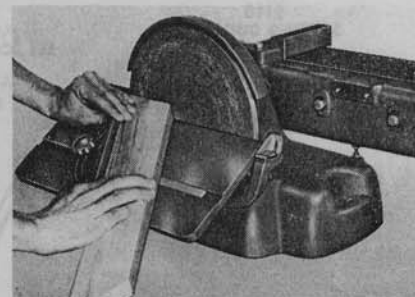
Disc sanding with the mitre gauge. Be sure to tighten inner knob after adjustment is made.
